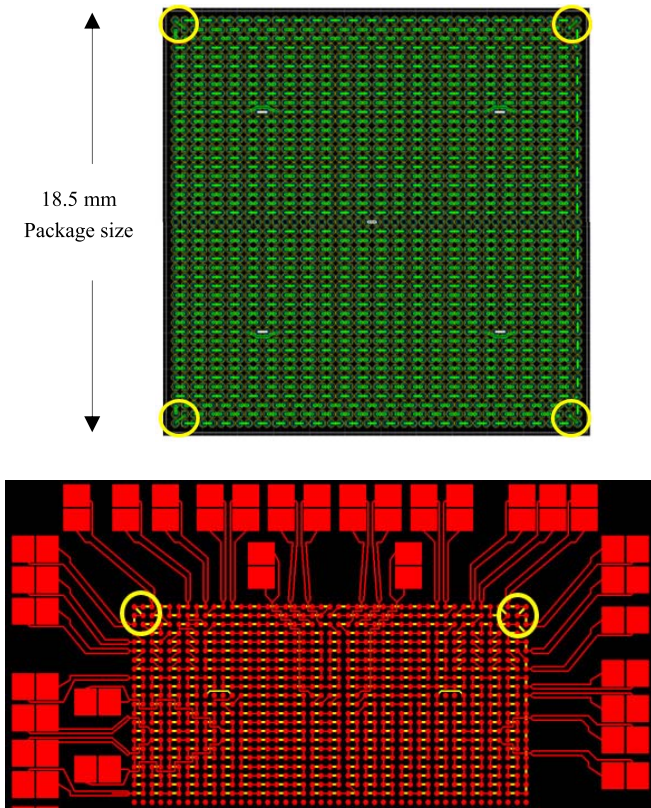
Dog-bone structures on the package side of the test vehicle (top) and PCB board design with four-point probing pads (bottom).
